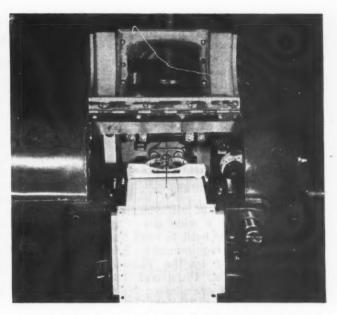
Close-up View of Electrical Recorder for Charting Errors in Lead of Helical Gears and Other Surfaces
